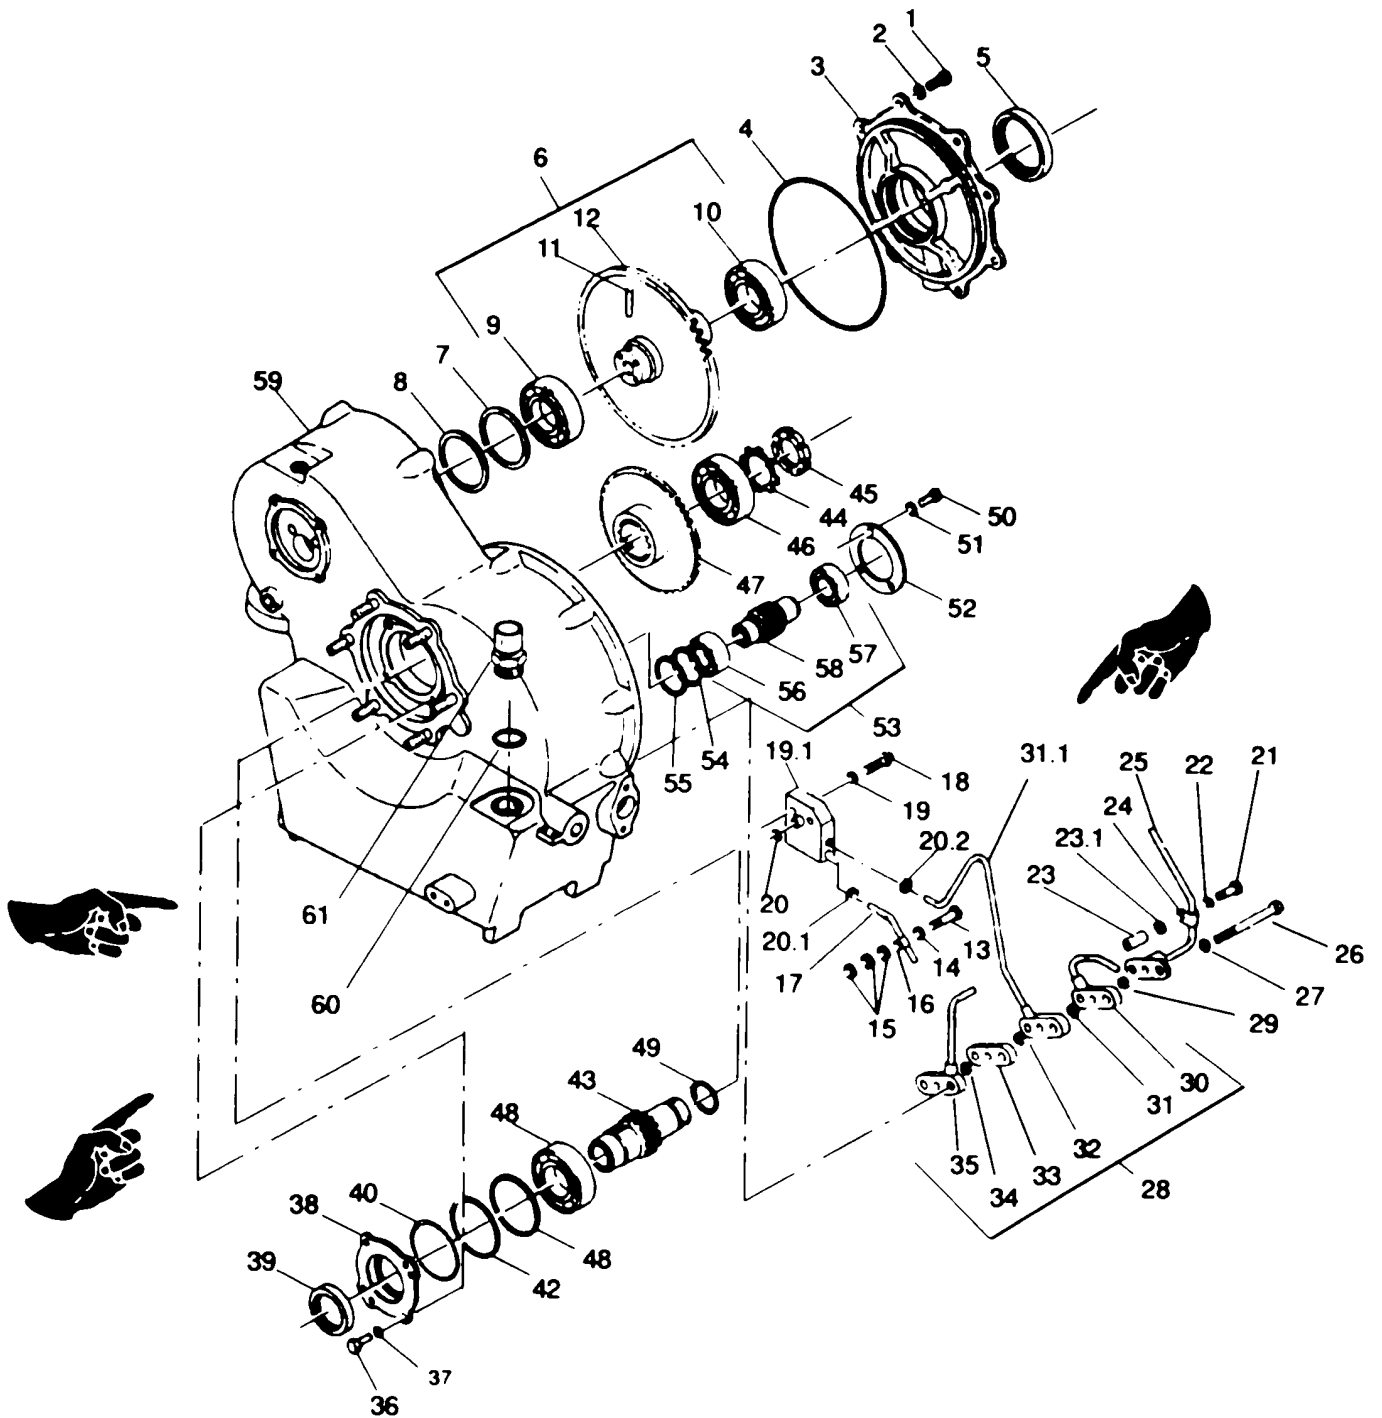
Gearbox Disassembly (Sheet 1 of 2)
